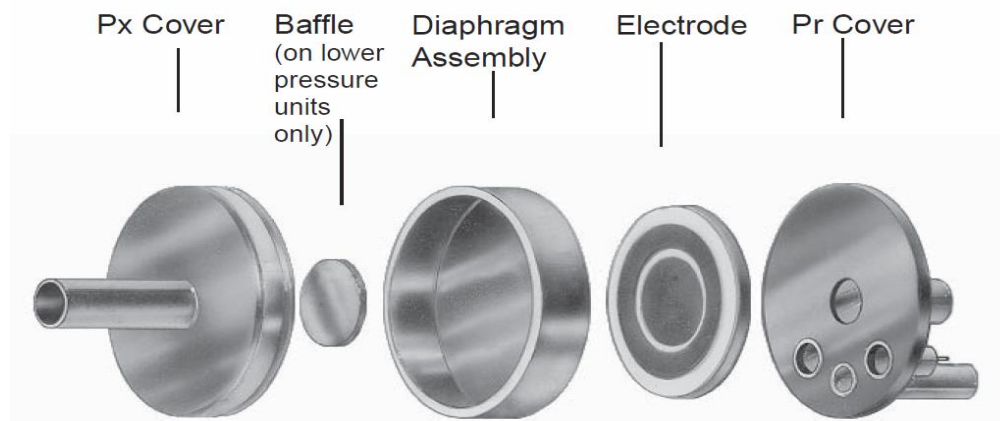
Exploded View of a MKS Capacitance Manometer Sensor
